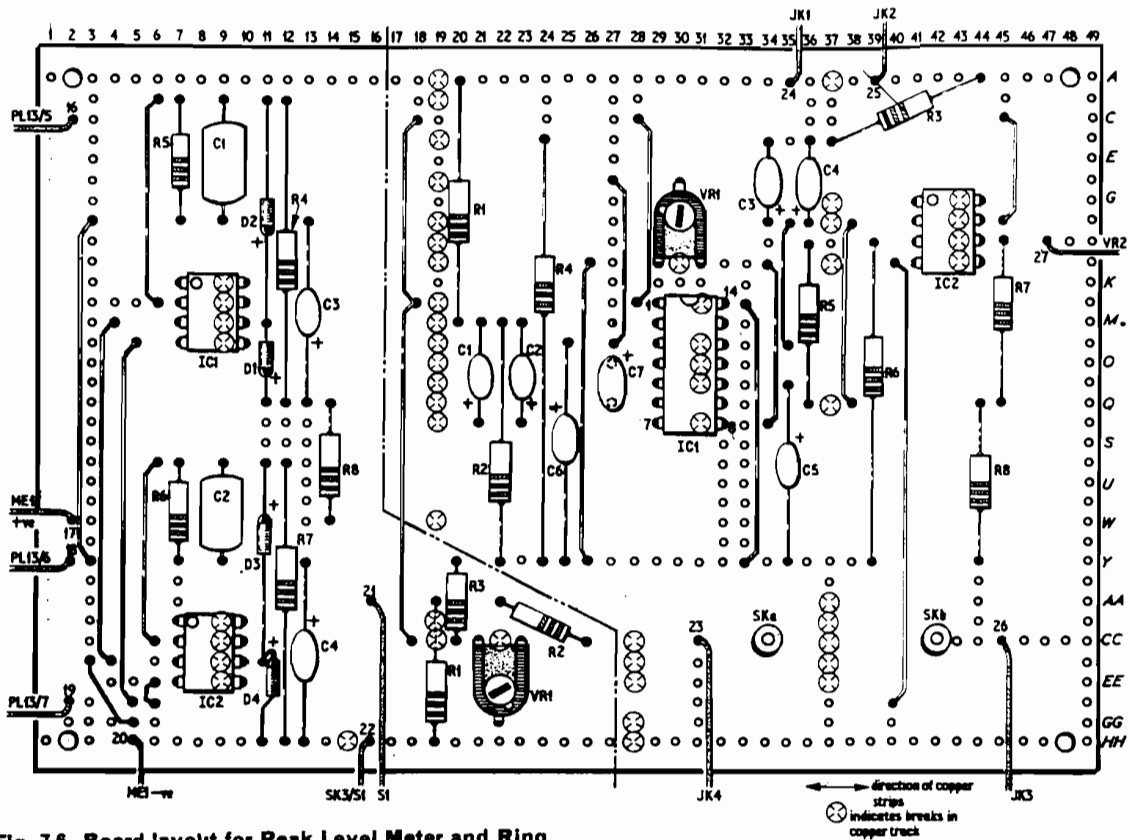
Board layout for Peak Level Meter and Ring Modulator
